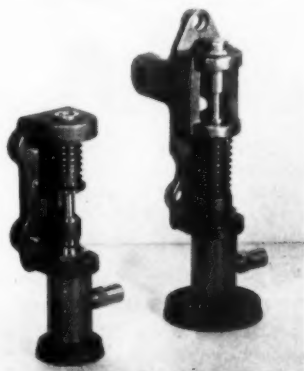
Automatic, or power operated continuous lubricator. The smaller one, on the left is used on the Jones & Lamson machine, figure 7.
